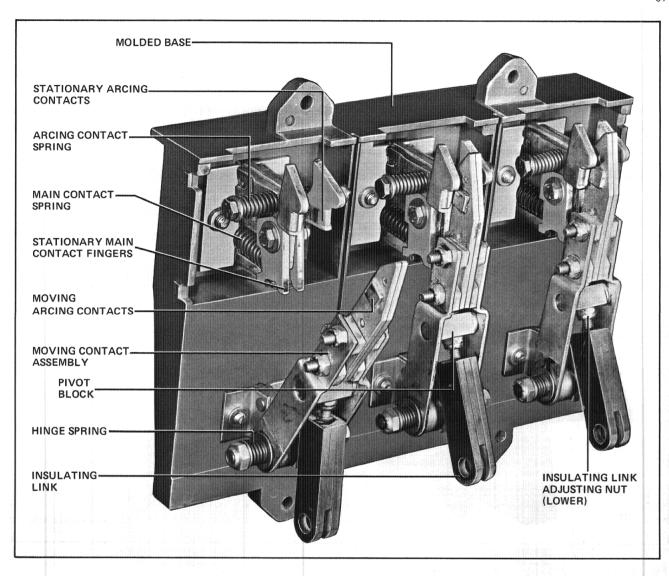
Type DS-206 Pole Unit Assembly - Front View
